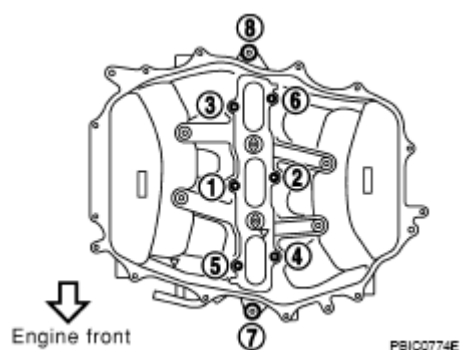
Identifying Intake Manifold Collector (Lower) Bolts Tightening Sequence
